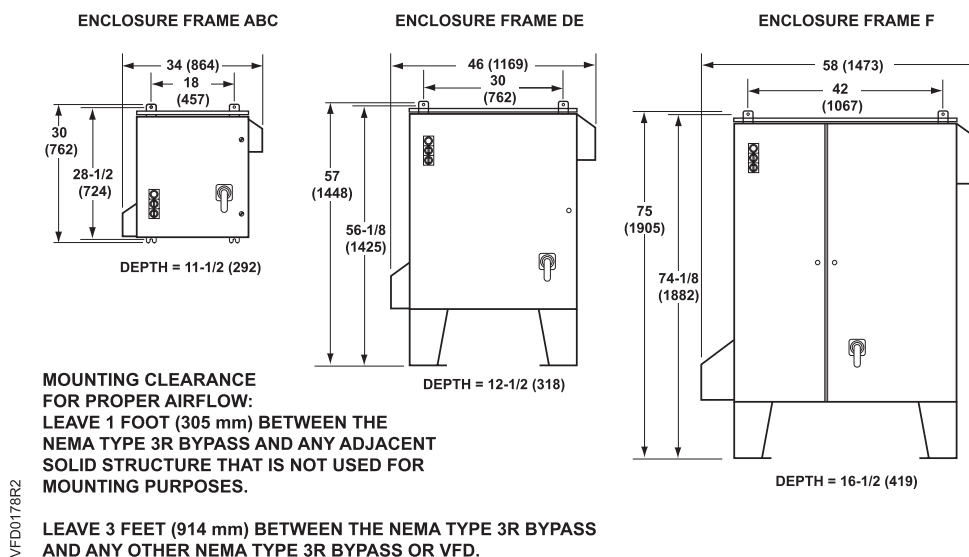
NEMA Type 3R Bypass Dimensions in Inches (Millimeters).
